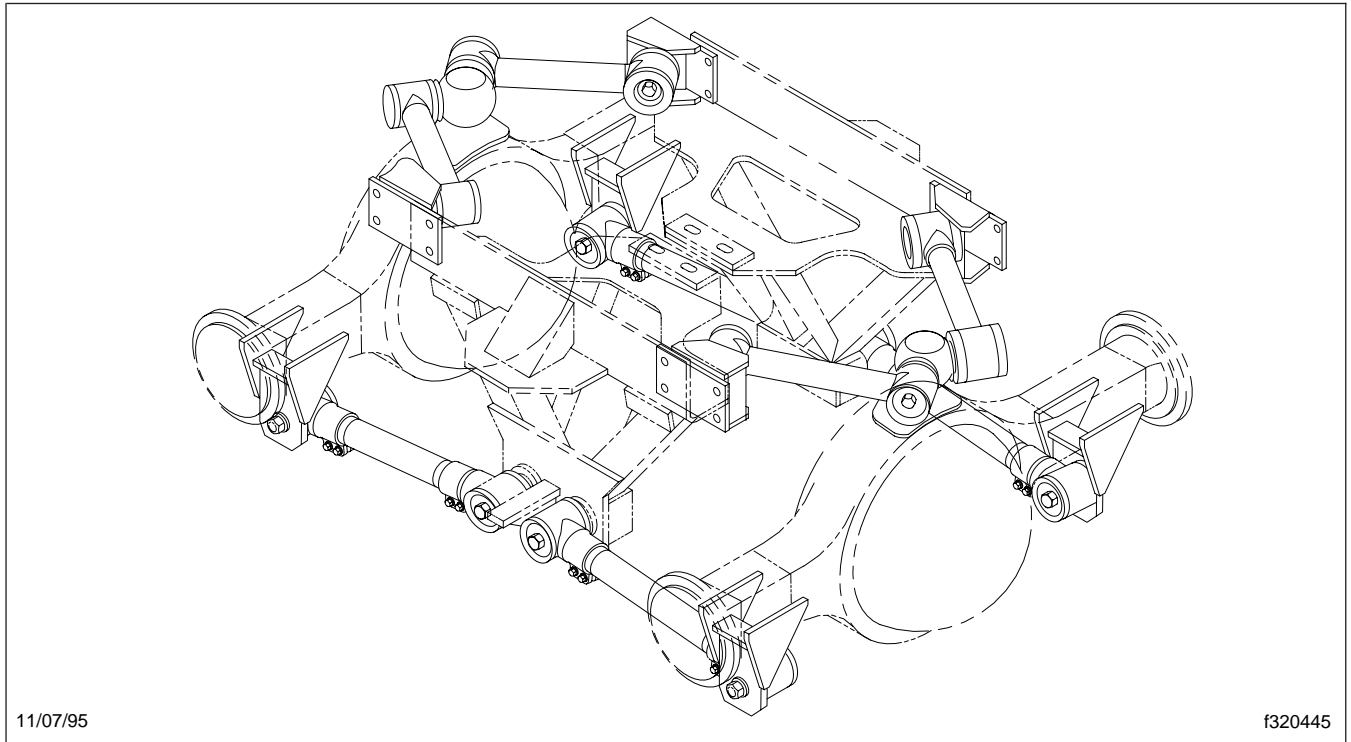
, Torque Rod Arrangement, 40,000-Pound Capacity Suspension
